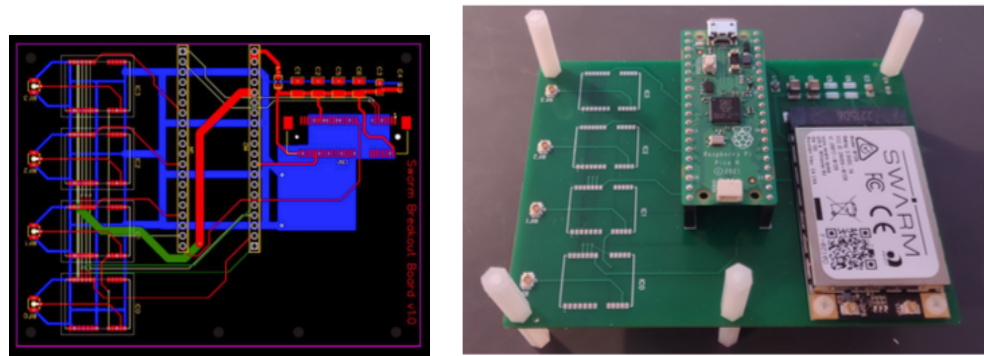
Board design: PCB layers and board populated with Raspberry and Swarm modules.
